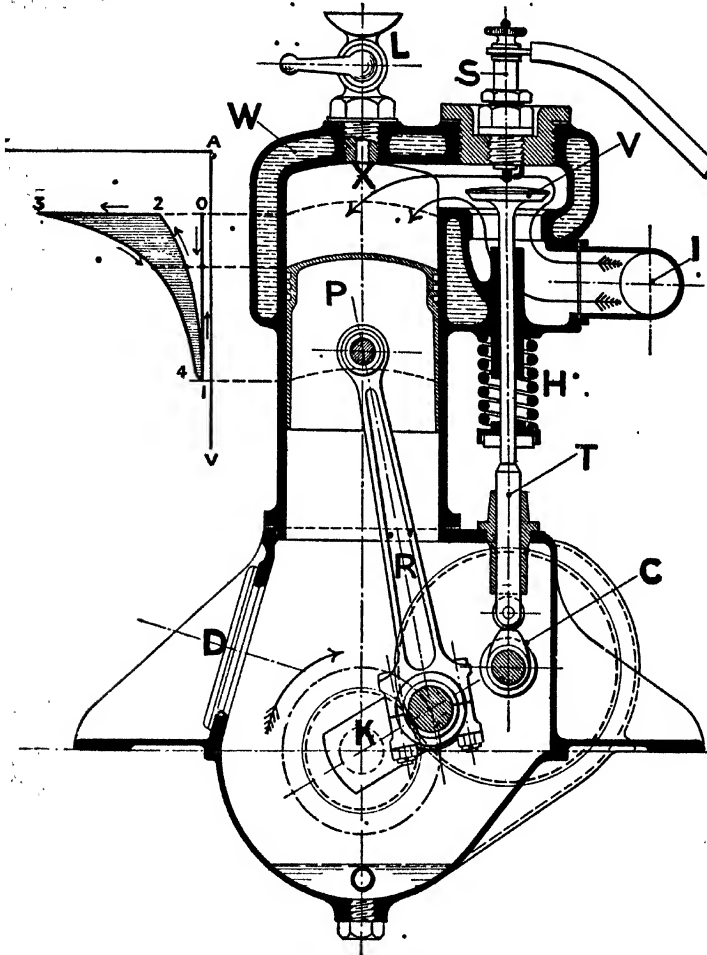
Diagram of a typical four-stroke petrol engine.
